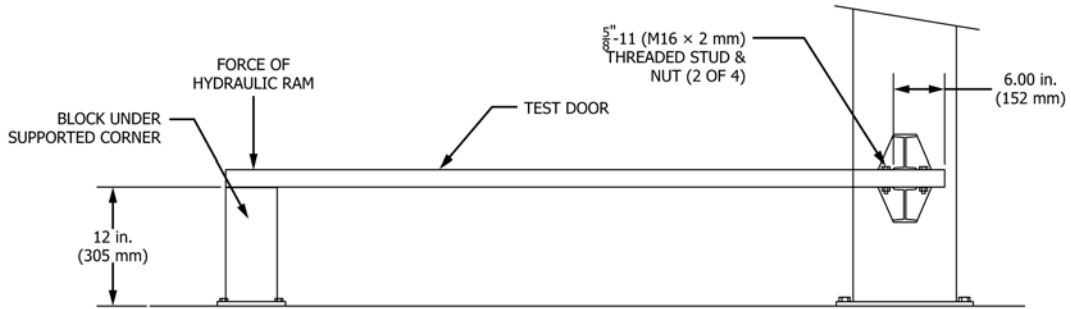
Section B-B from Fig. 10 Rack Test Fixture
